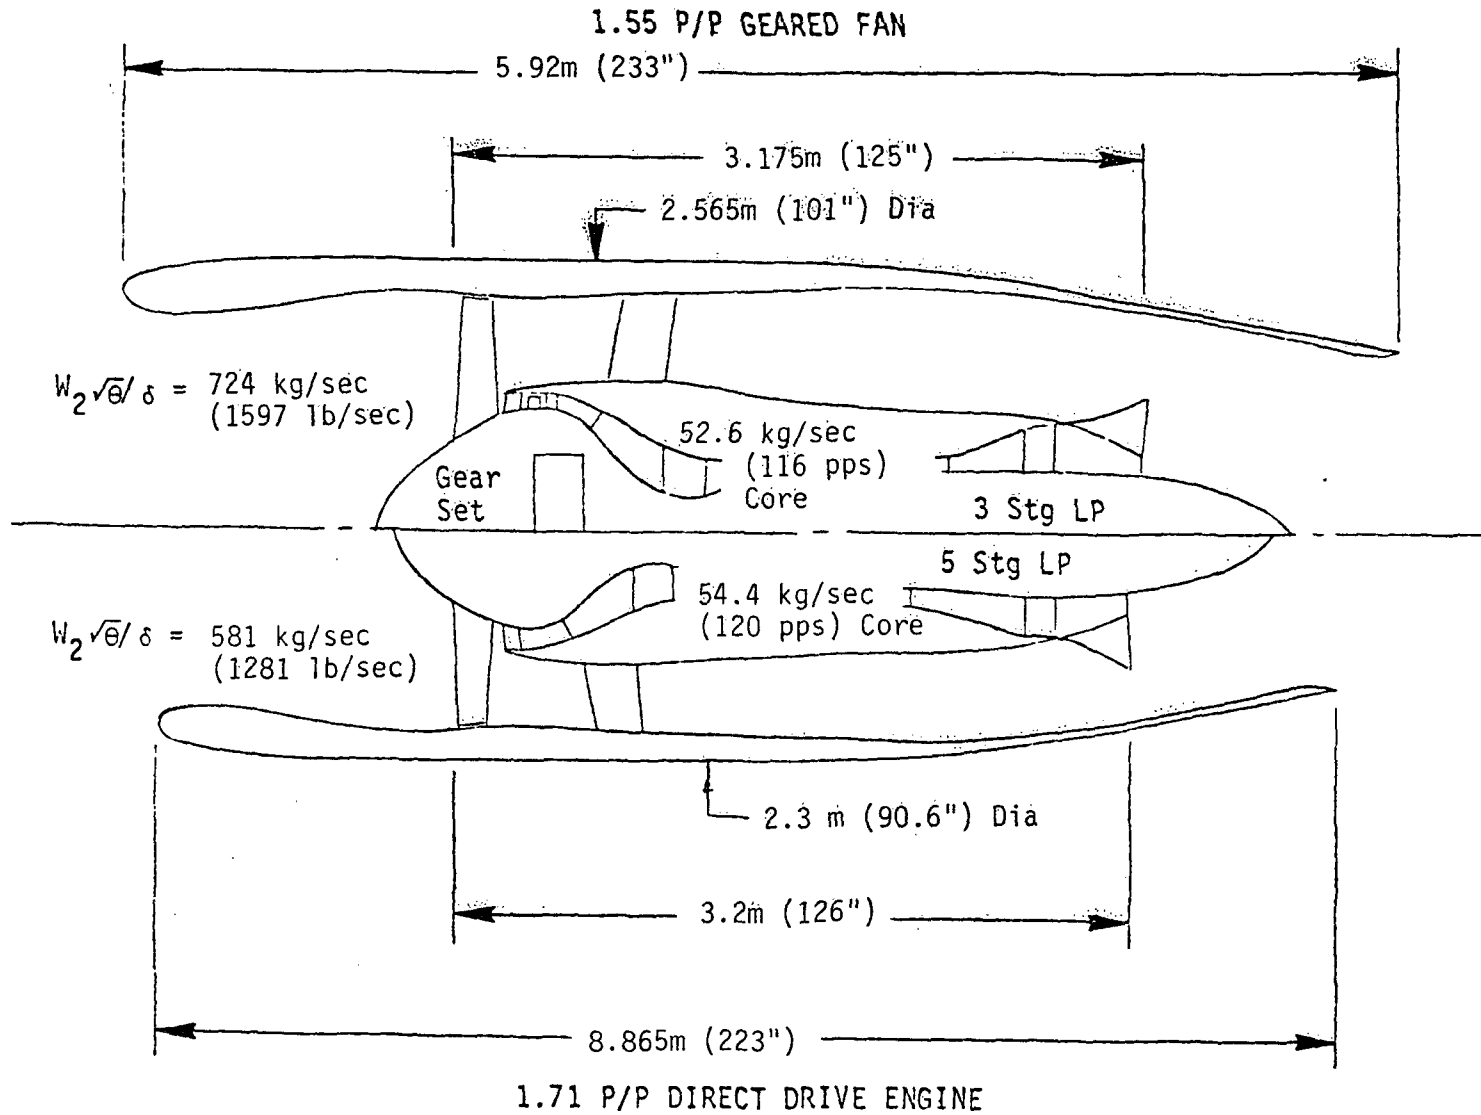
Geared Fan Dimensional Comparison with Direct-Drive Engine, Cruise Sized,
